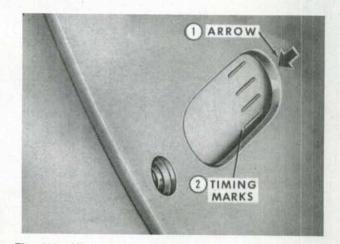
View with cover plate removed showing timing pointer on engine rear plate and timing marks on flywheel.
